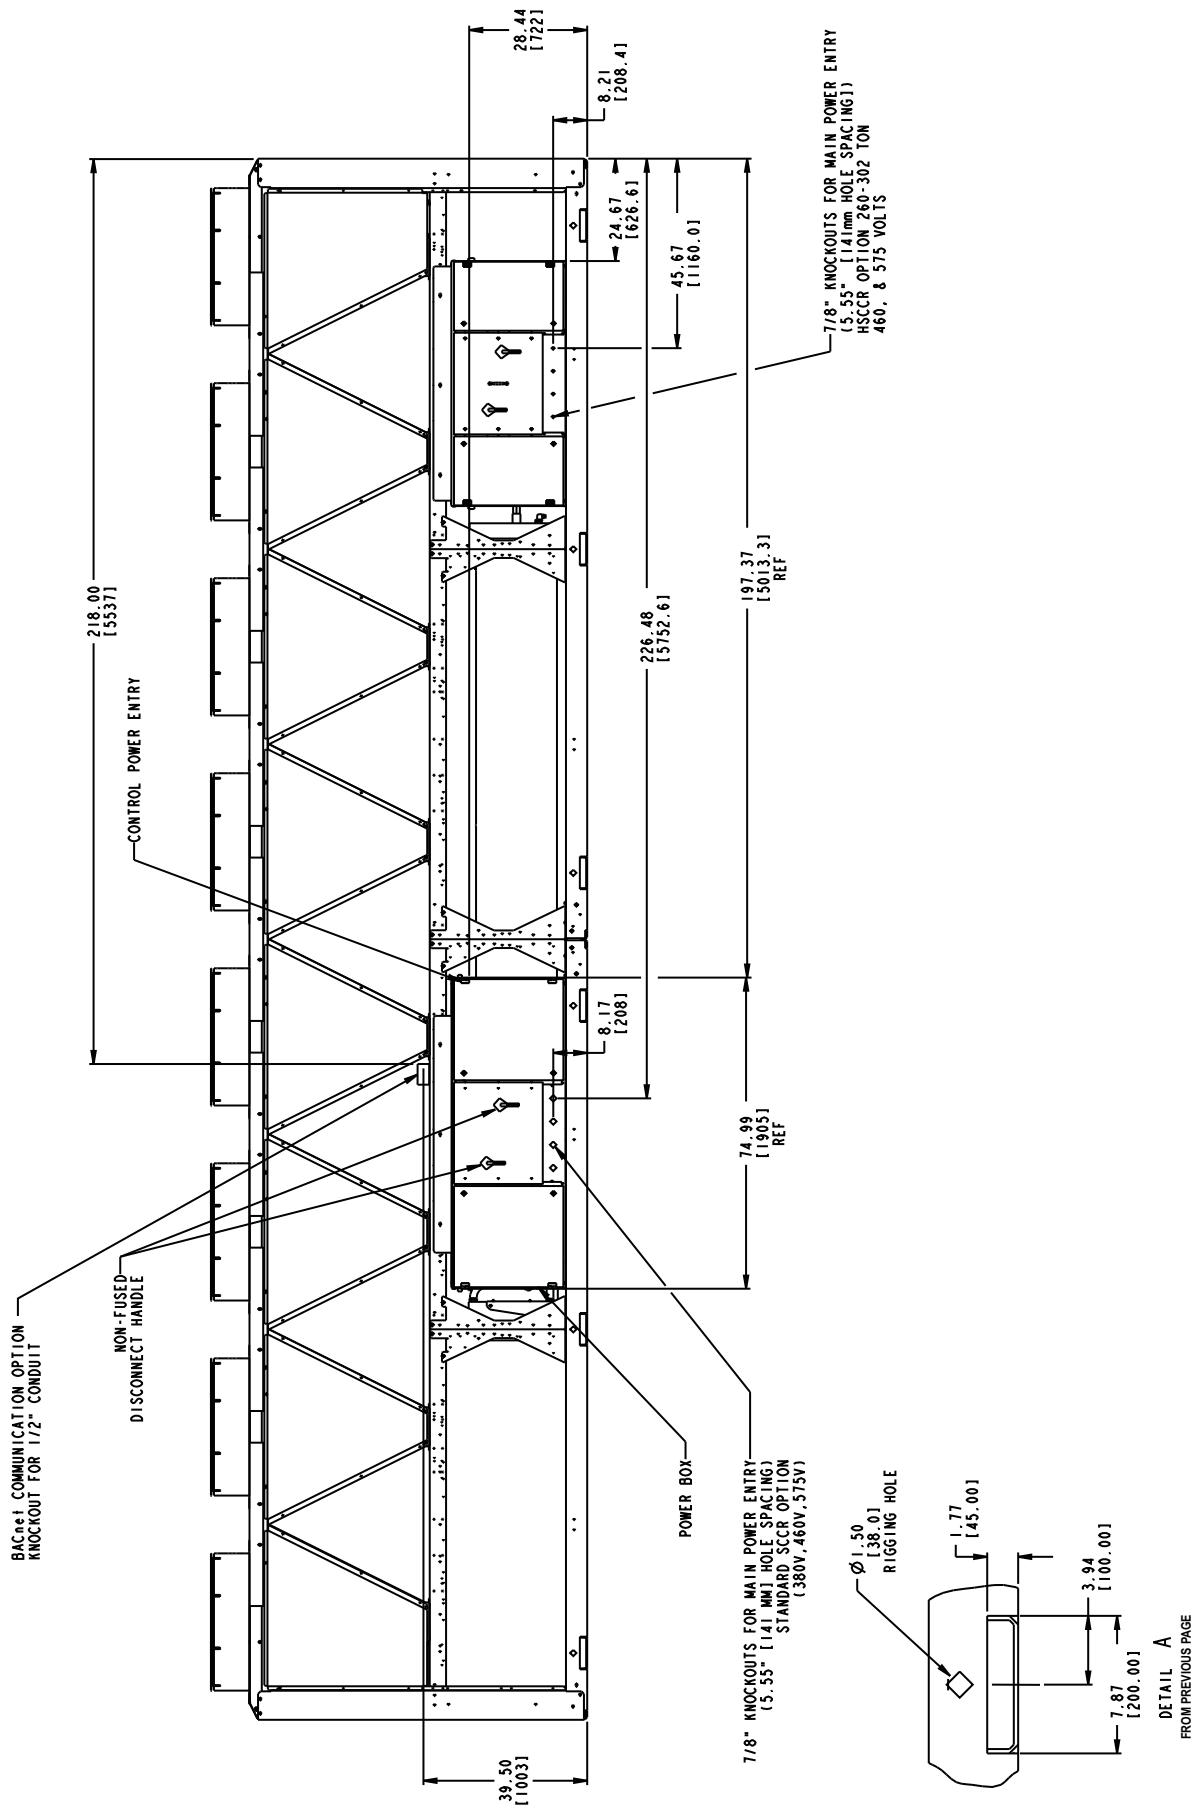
30XA262, 282 Air-Cooled Liquid Chiller Dimensions (cont)
